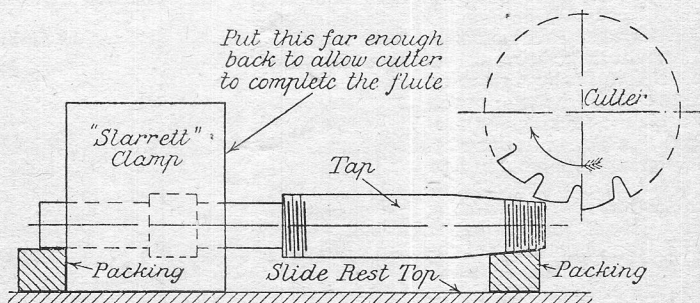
Tap held on slide-rest of lathe for milling flutes
